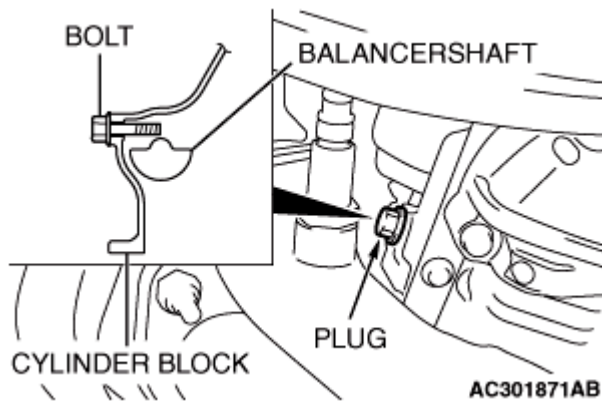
Identifying Cylinder Block Plug, Cylinder Block And Balancer Shaft
